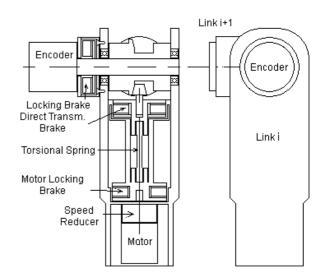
Scheme of an horizontal joint transmitting balancing torque
